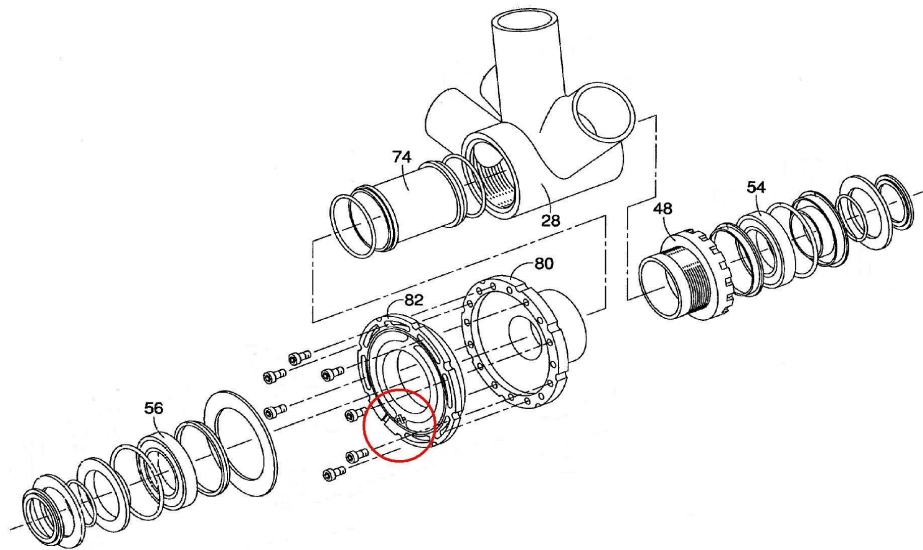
Force measurement in bottom bracket, with bearings (54, 56) mounted in cups (48, 80) externally to the bottom bracket tube (74). Right hand bearing mounted in special insert (82) to concentrate forces to area with strain gauge (in circle). [16]
